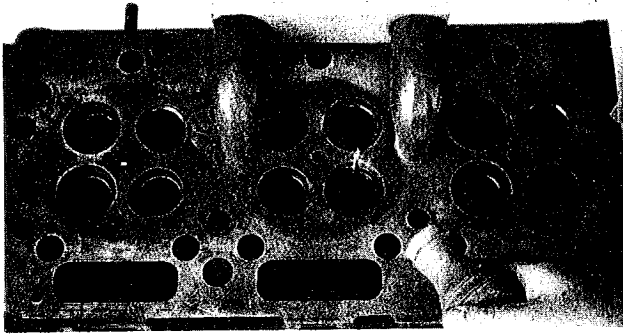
Place tool as shown above. Fill bulb one-third full of powder. You are now checking for cracks that run across the cylinder head (in line with the poles). Spray powder lightly into combustion chamber. Gently blow off excess. Powder will remain in crack.
